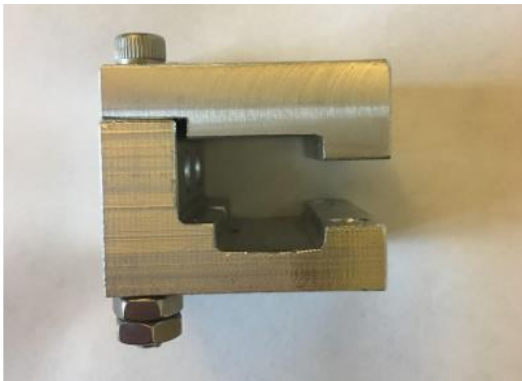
2<sup>nd</sup> grip design, final machined part
